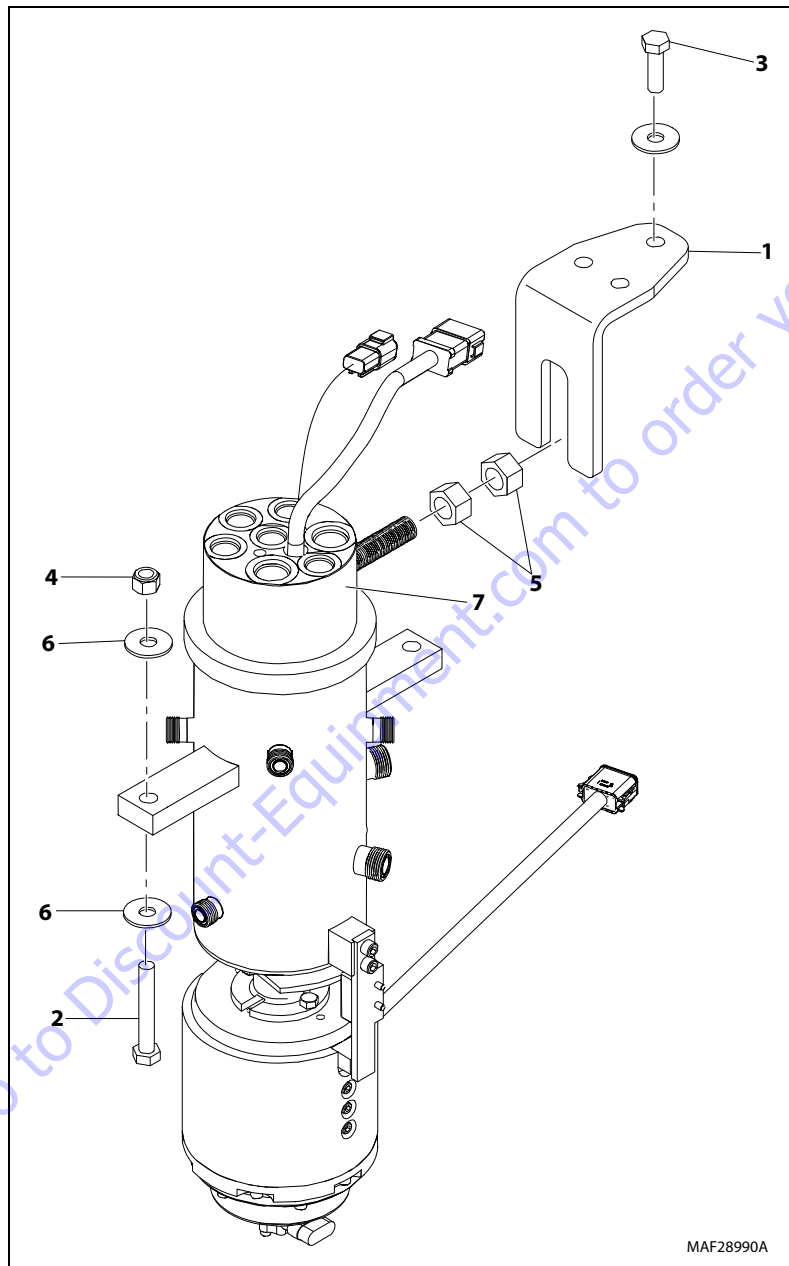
Swing Bearing Removal - Sheet 4 of 4
